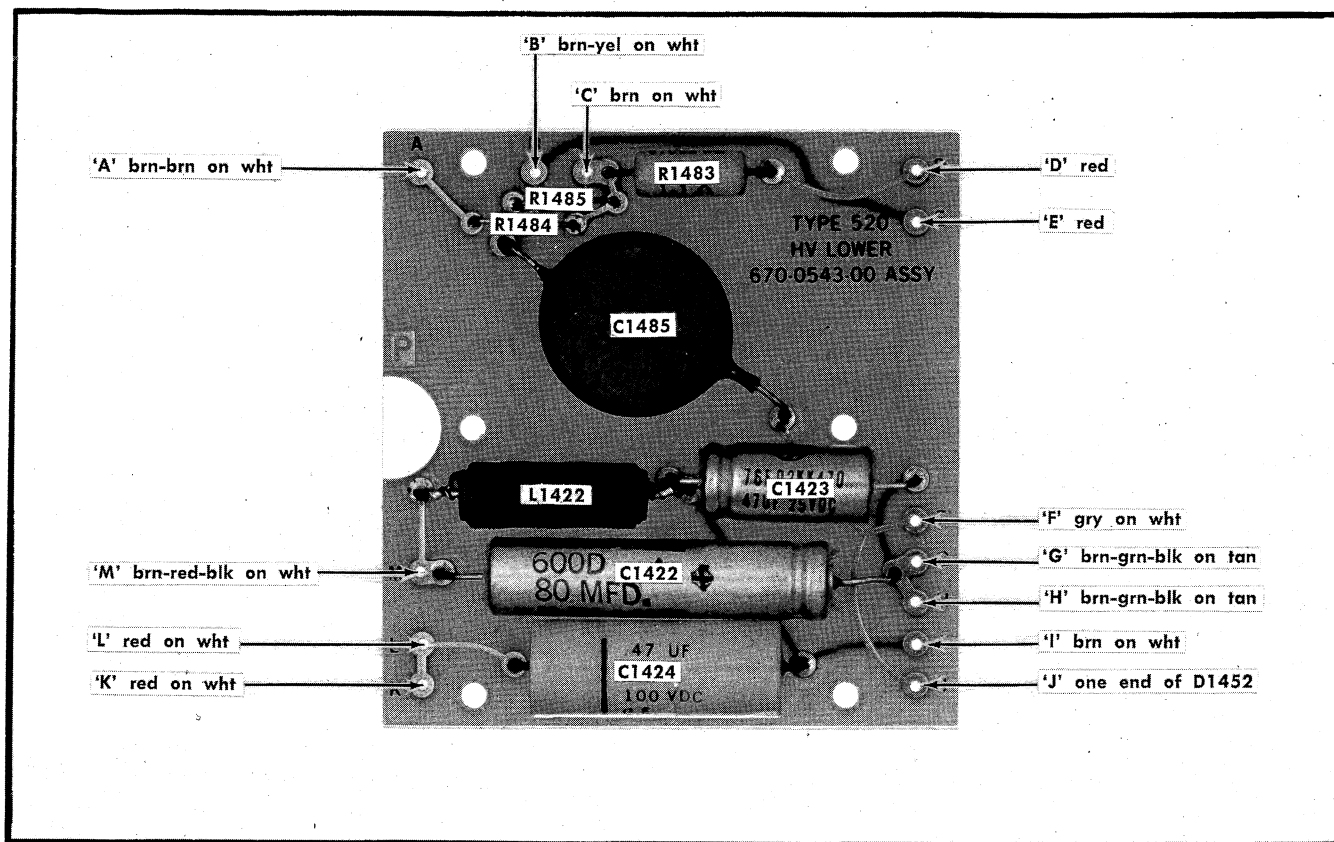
Lower High Voltage board; component identification and wire color codes.
